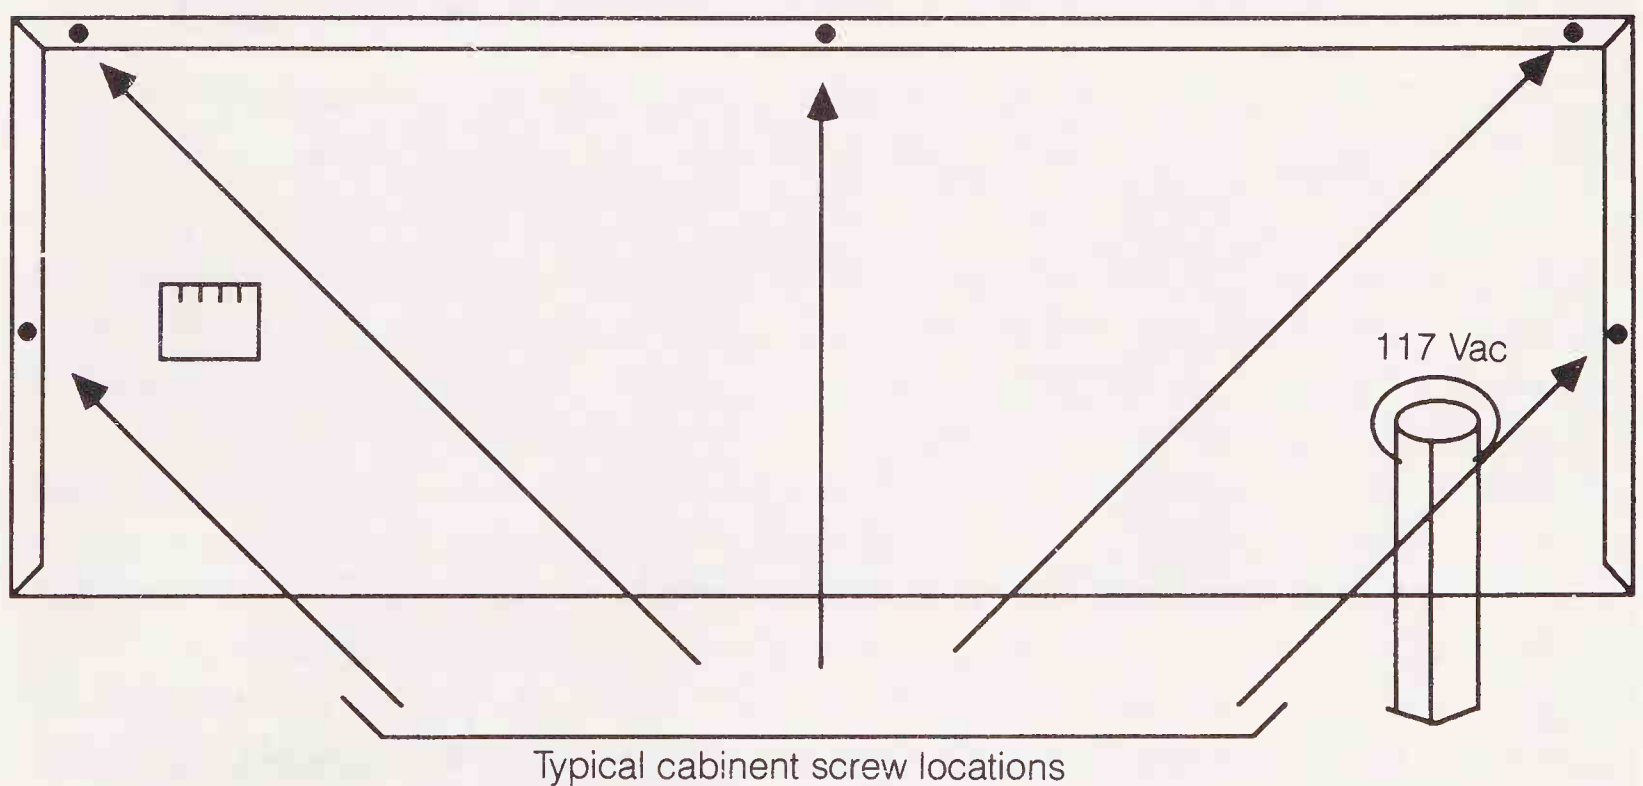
Typical screw locations for the top/back cover of the fax machine (of course, your machine might differ).
